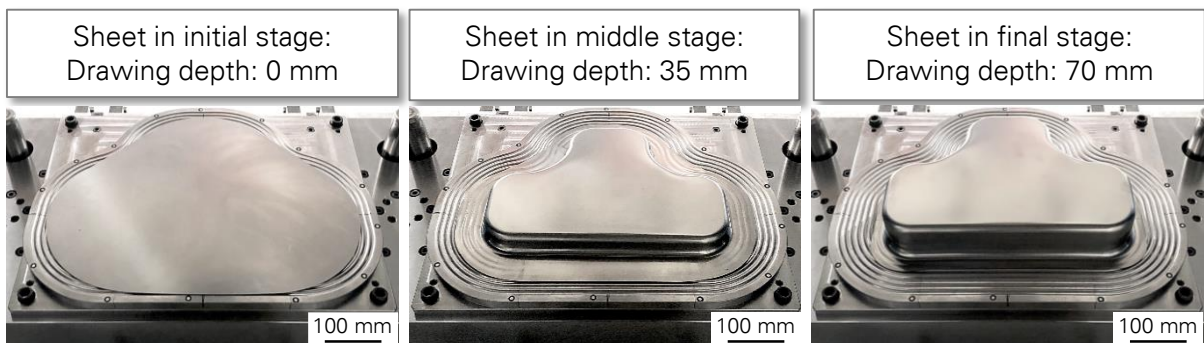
Progress of the deep drawing of the T-Cup with macro-structured tools
